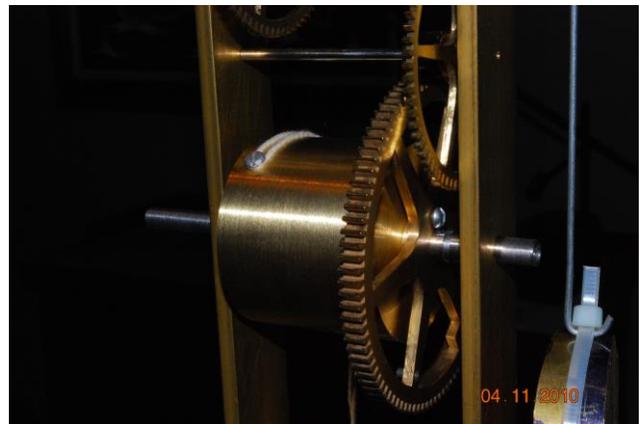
Temporary holes in the fusee blank are used to fasten the great wheel and cable.
